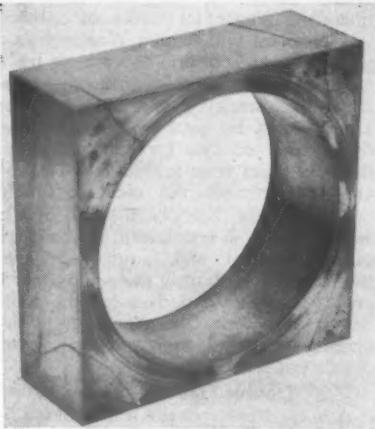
Photograph of dimensional change test specimen cracked on normal oil quenching.
